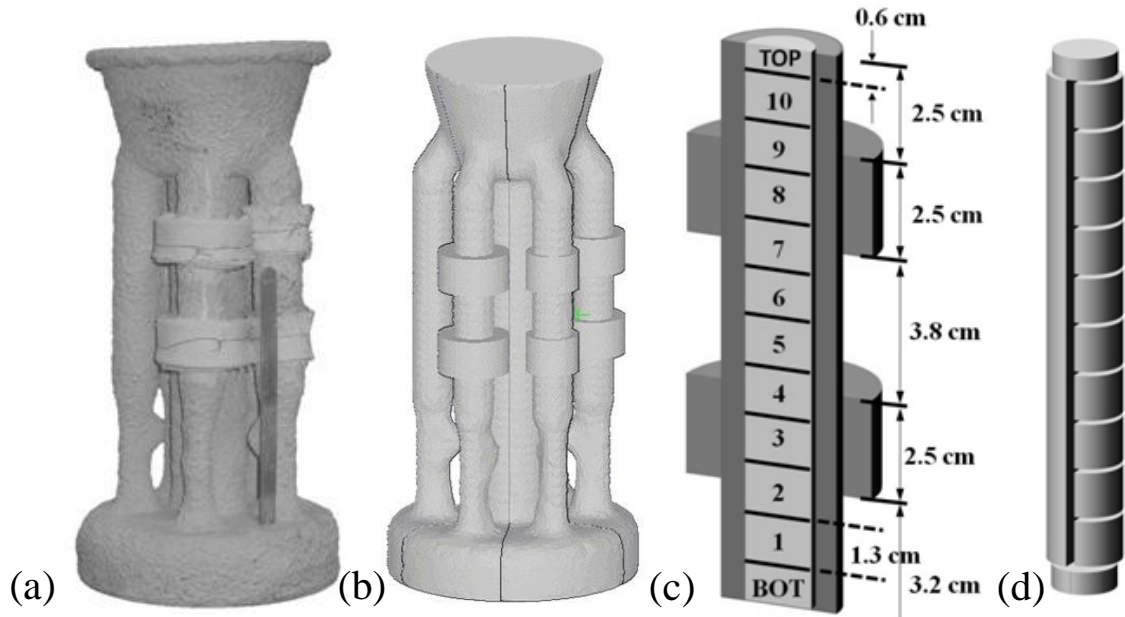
(a) Experimental and (b) simulated mold configuration with (c) plan and (d) exploded view of sectioning.
